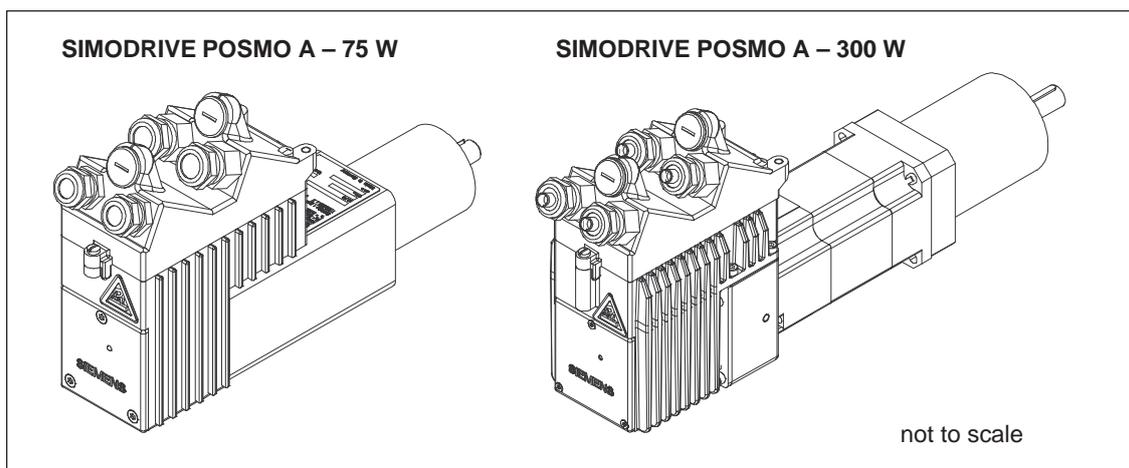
SIMODRIVE POSMO A positioning motor with connection cover and gearbox
